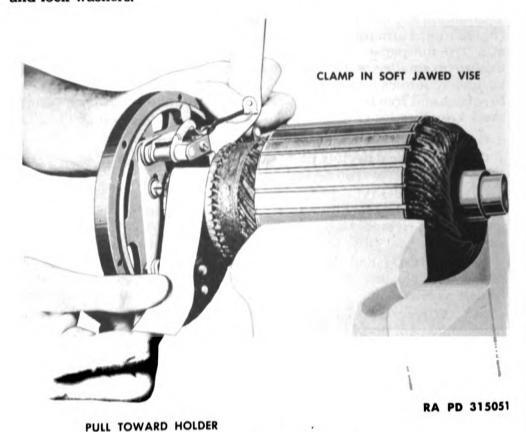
Seating New Generator Brushes with 2/0 Flintpaper— GBG-type Generators
